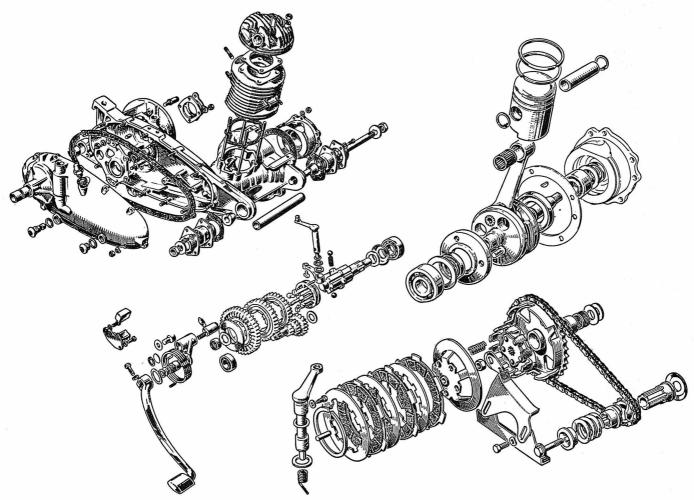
Exploded view of Cento three speed transmission, clutch and engine assembly.
